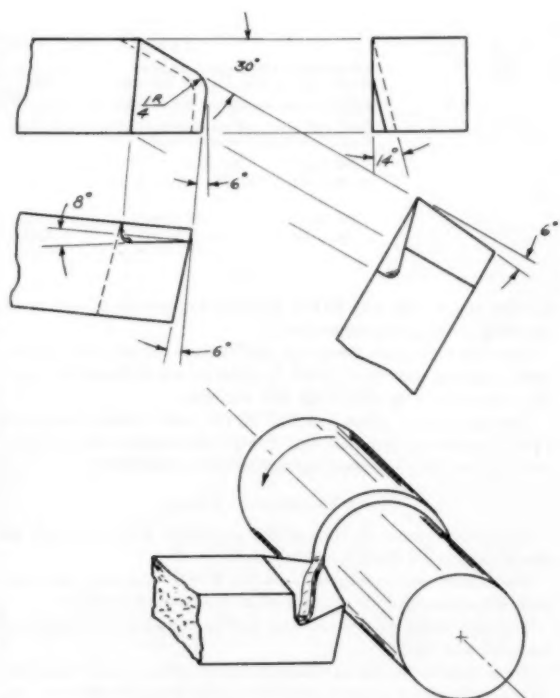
ASME LATHE TOOL SHAPE NO. 4, 18-4-1 HSS
